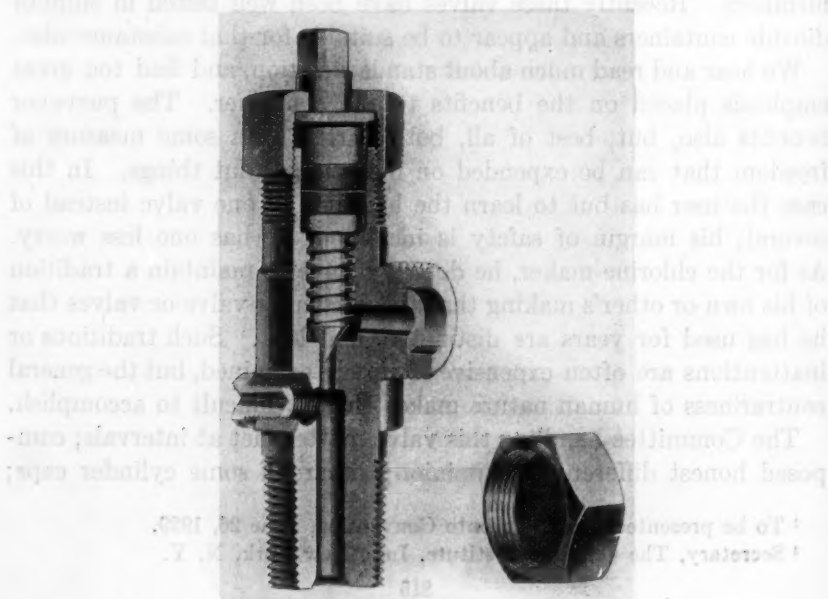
THE STANDARD VALVE WITH ONE-QUARTER SECTION REMOVED
